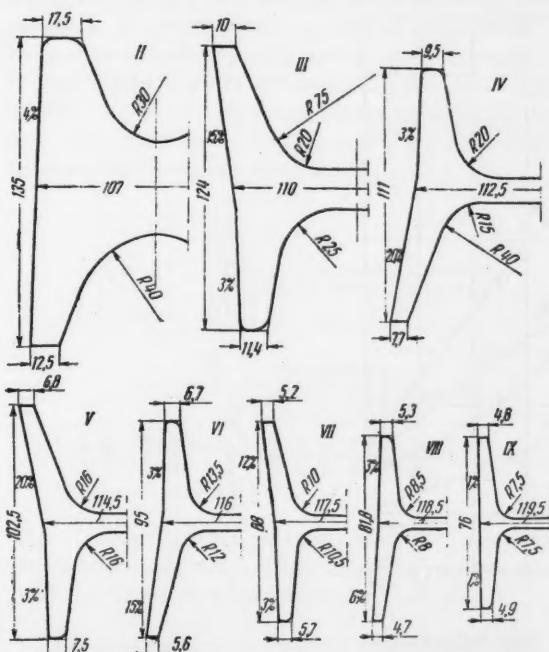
Dimensions of the templates for rolling light-section beam No. 12; II-IX stands.
